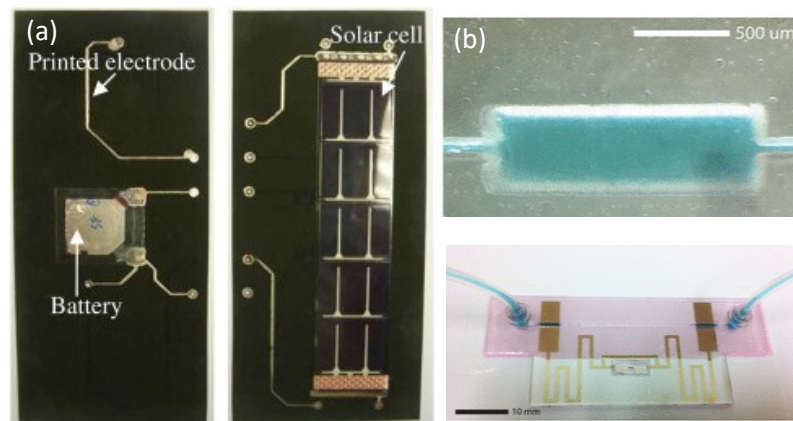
Images of printed parts using Ink-jet printing. (a) Copper ink printed electrodes and solar cells.[159] (b) Ink-jet printed microfluidic device. [160]
